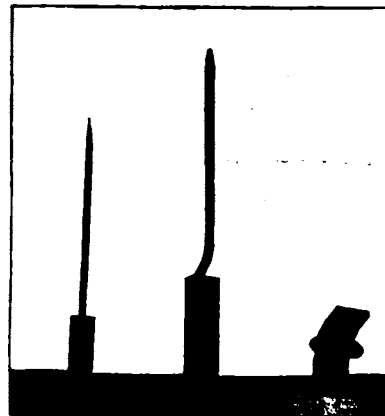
TEMPERED COPPER SOLDERING TOOLS.
